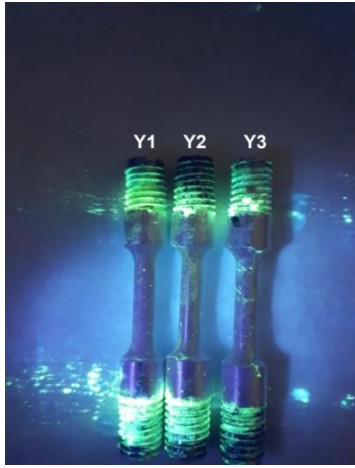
Liquid penetrant inspection of road wheel fatigued test specimens
